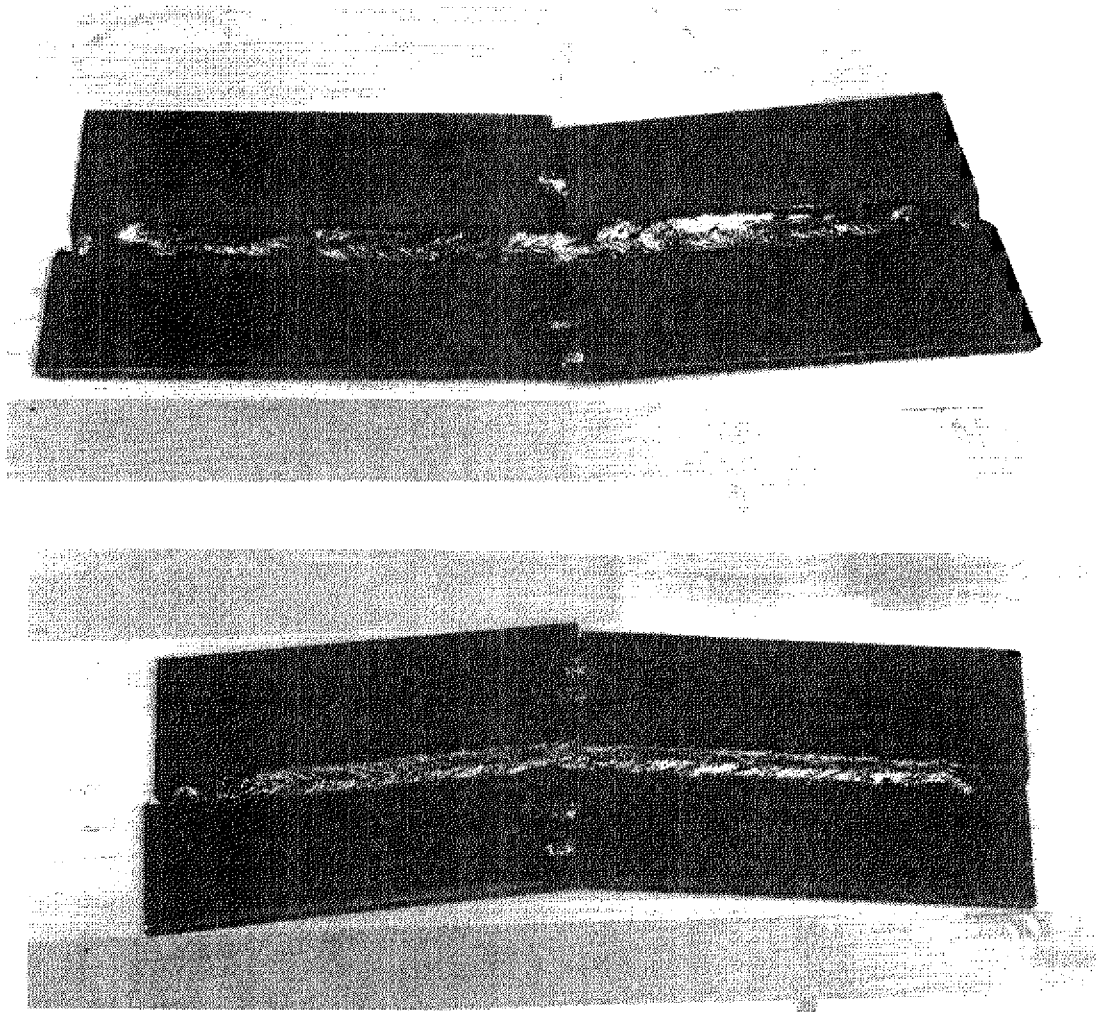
Sample of welding seam tracking with spinning arc sensor. Upper : underwater welding, bottom: in-air welding.
